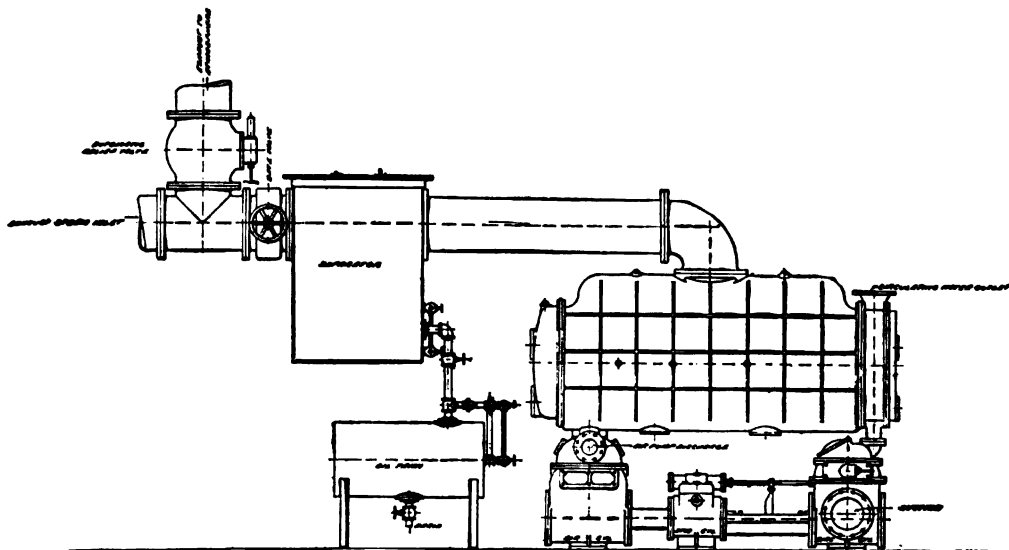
Arrangement of Baker Oil Separator and Wheeler Surface Condenser Mounted upon Combined Air and Circulating Pumps.
